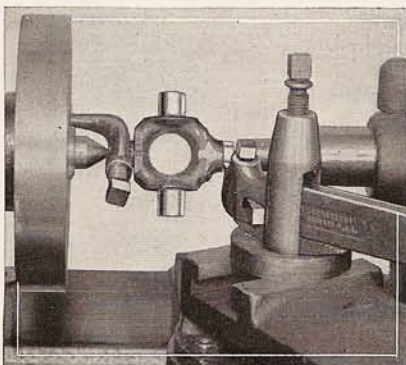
Worn Universal Joint Salvaged by Re-Machining and Bushing.
